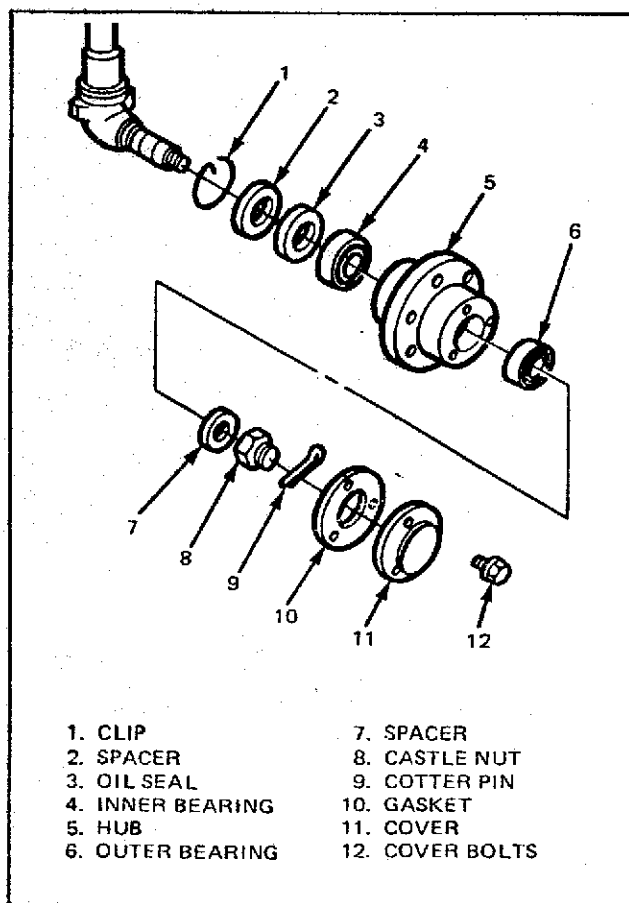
Servicing Front Wheel Bearings — Two-Wheel Drive
